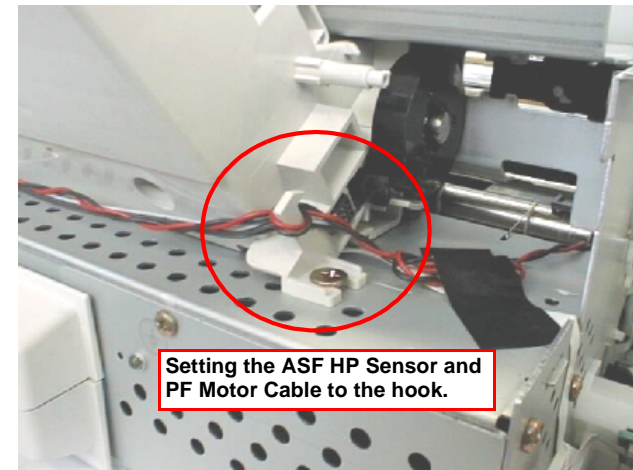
Setting the ASF HP Sensor & PF Motor cable
